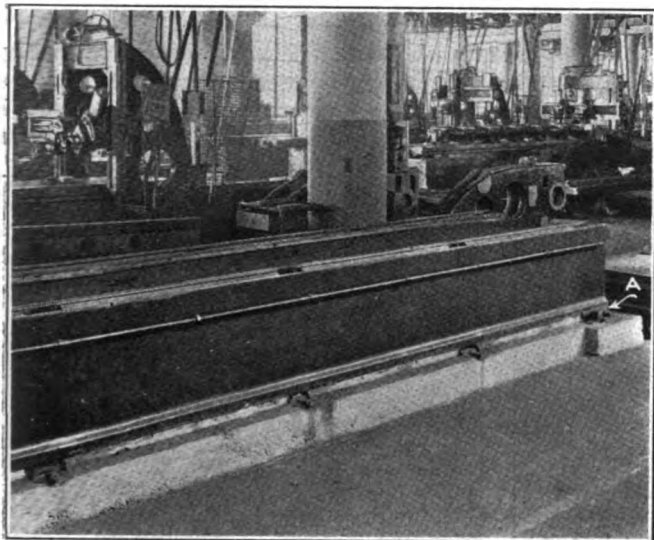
LARGE PLANER FOUNDATION AND ALIGNING JACKS
